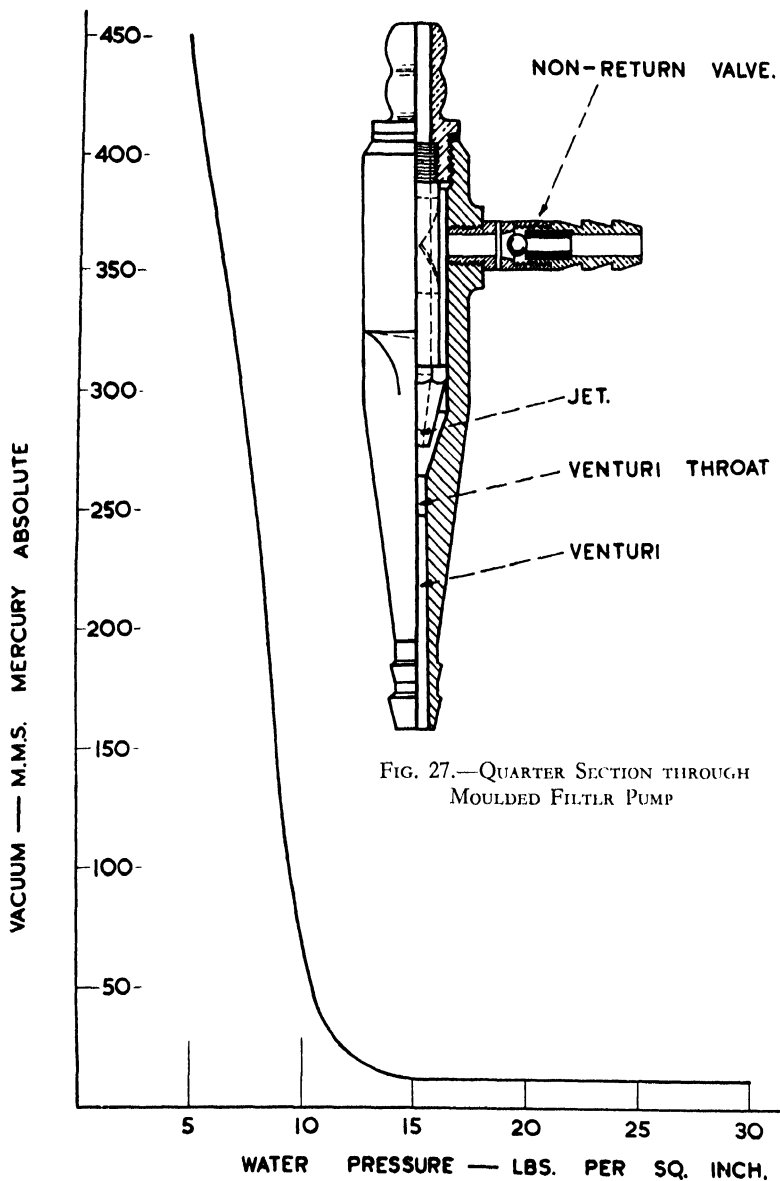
QUARTER SECTION THROUGH MOULDED FILTER PUMP
